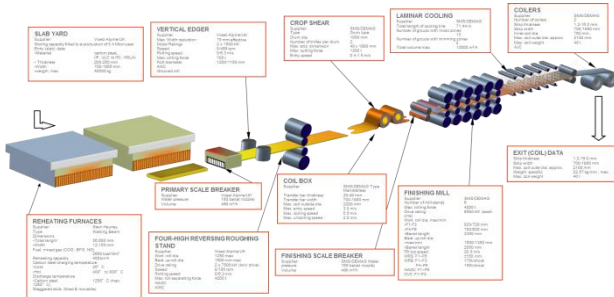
ArcelorMittal Tubarão Hot Strip Mill Layout.
